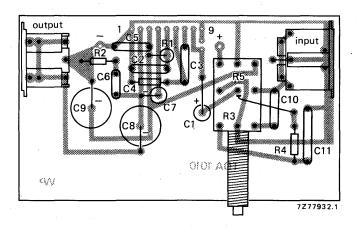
Component side of printed-circuit board showing component layout used for the circuit of Fig. 9.
